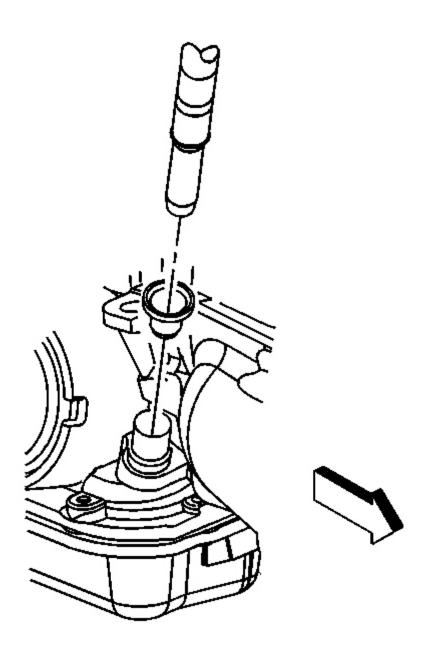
View Of Oil Level Indicator Tube & Seal Courtesy of GENERAL MOTORS CORP.
